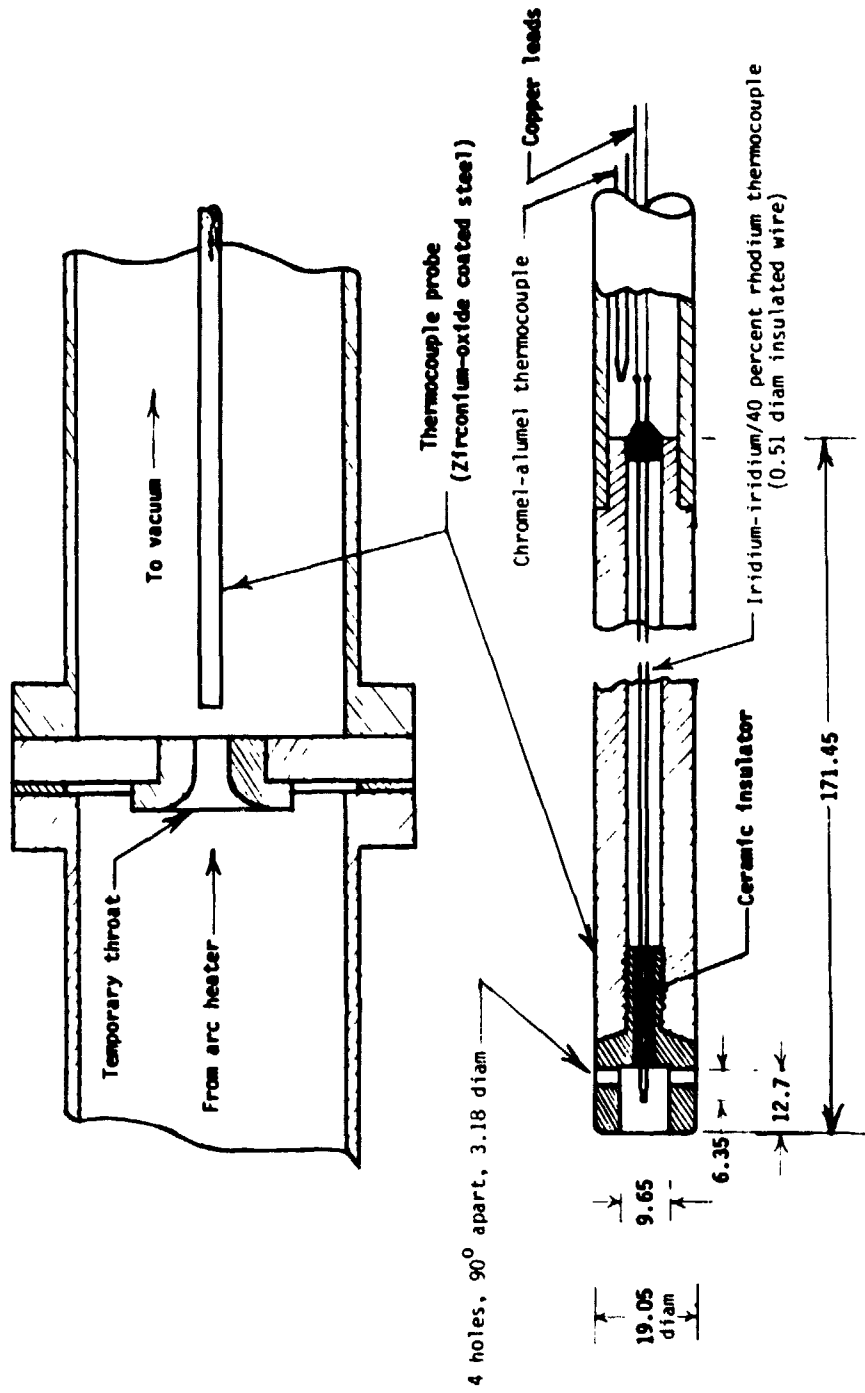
Detail of total-temperature probe and test arrangement. Dimensions are in millimeters.
